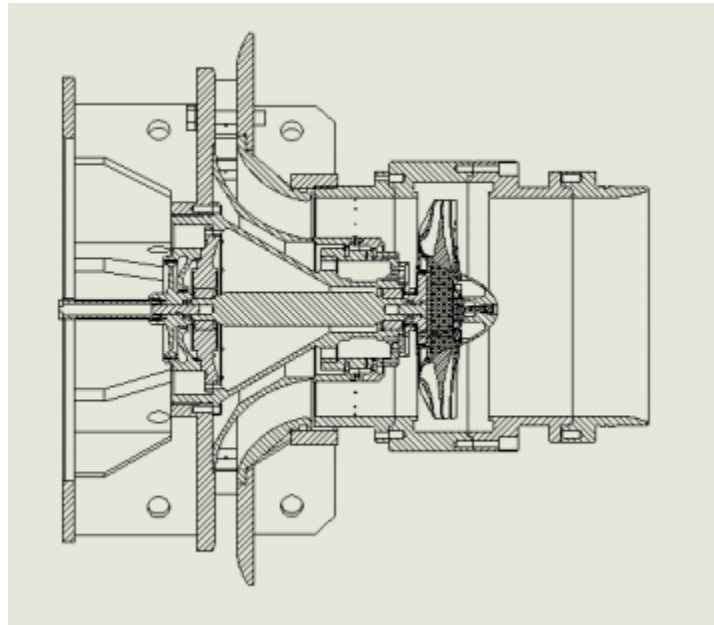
TCR final rotor stage engineering drawing. Source: [5].
